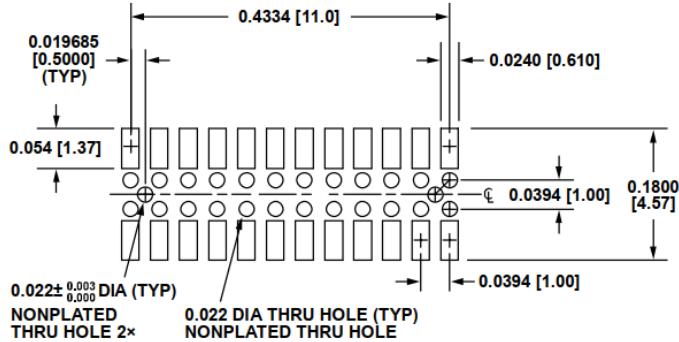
Suggested Layout and Mechanical Design When Using for the Mating Connector
